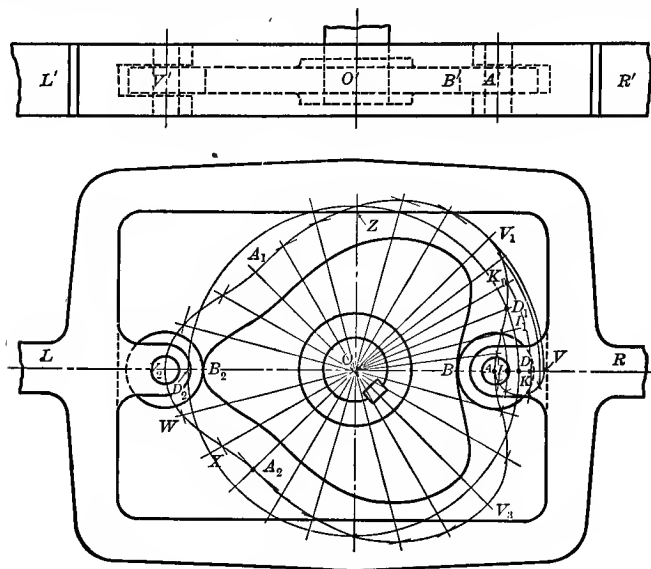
PROBLEM 13, SINGLE-DISK YOKE CAM
